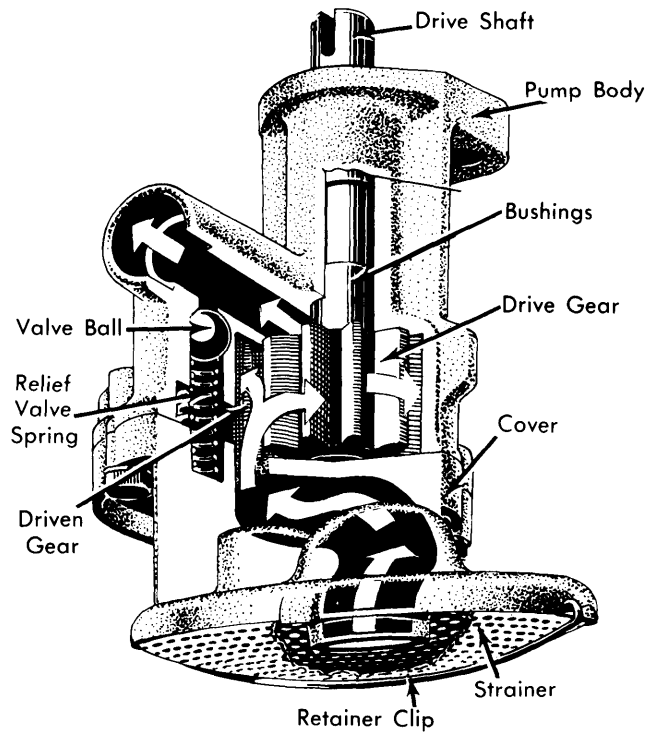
Cutaway & Operational View of Oil Pump Assembly
